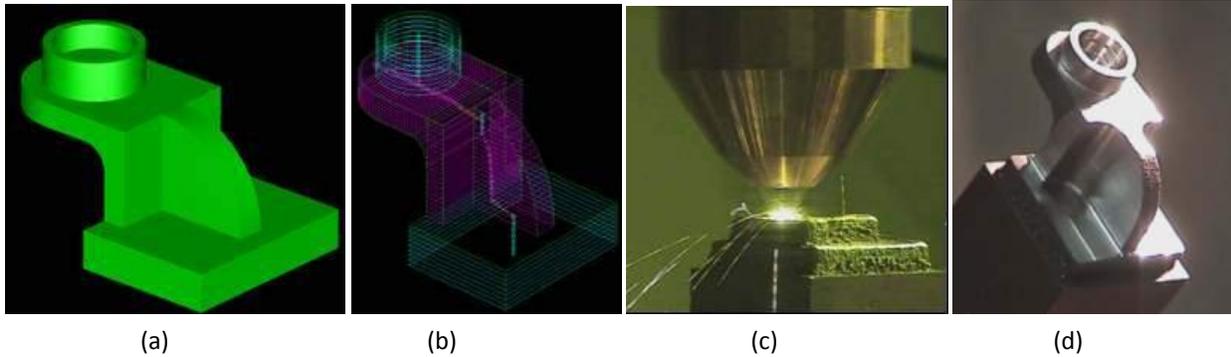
MAPS-driven hybrid manufacturing of an H13 tool steel bearing seat: (a) CAD model; (b) Automated generated tool path for deposition and machining; (c) Laser deposition; (d) After machining
